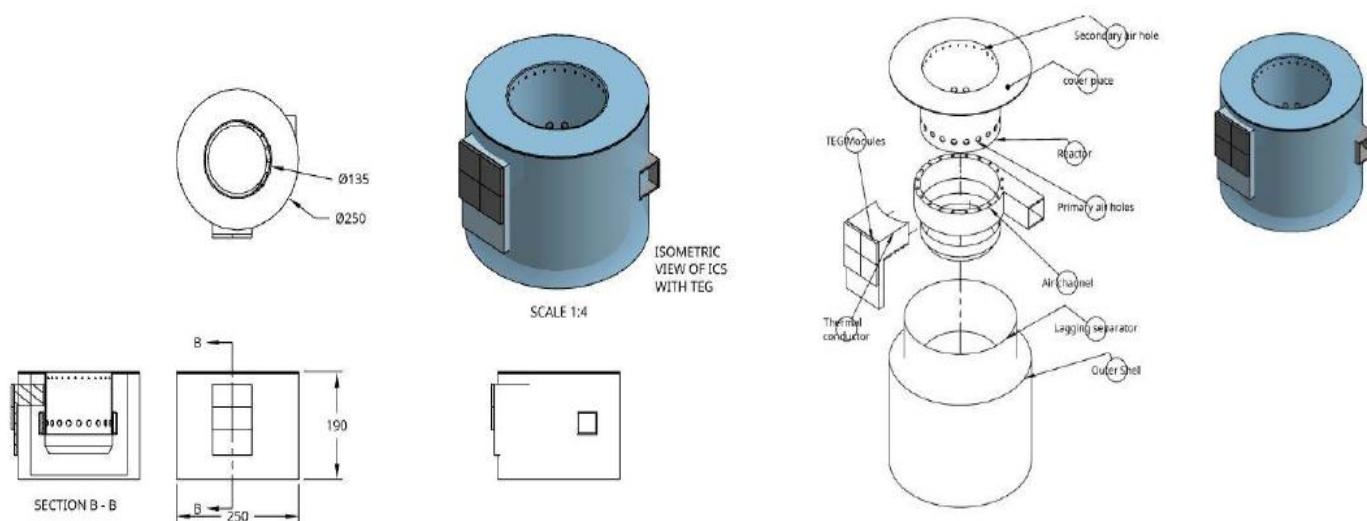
Orthographic view of the Improved cookstove 2b. Exploded view of designed Improved cookstove
